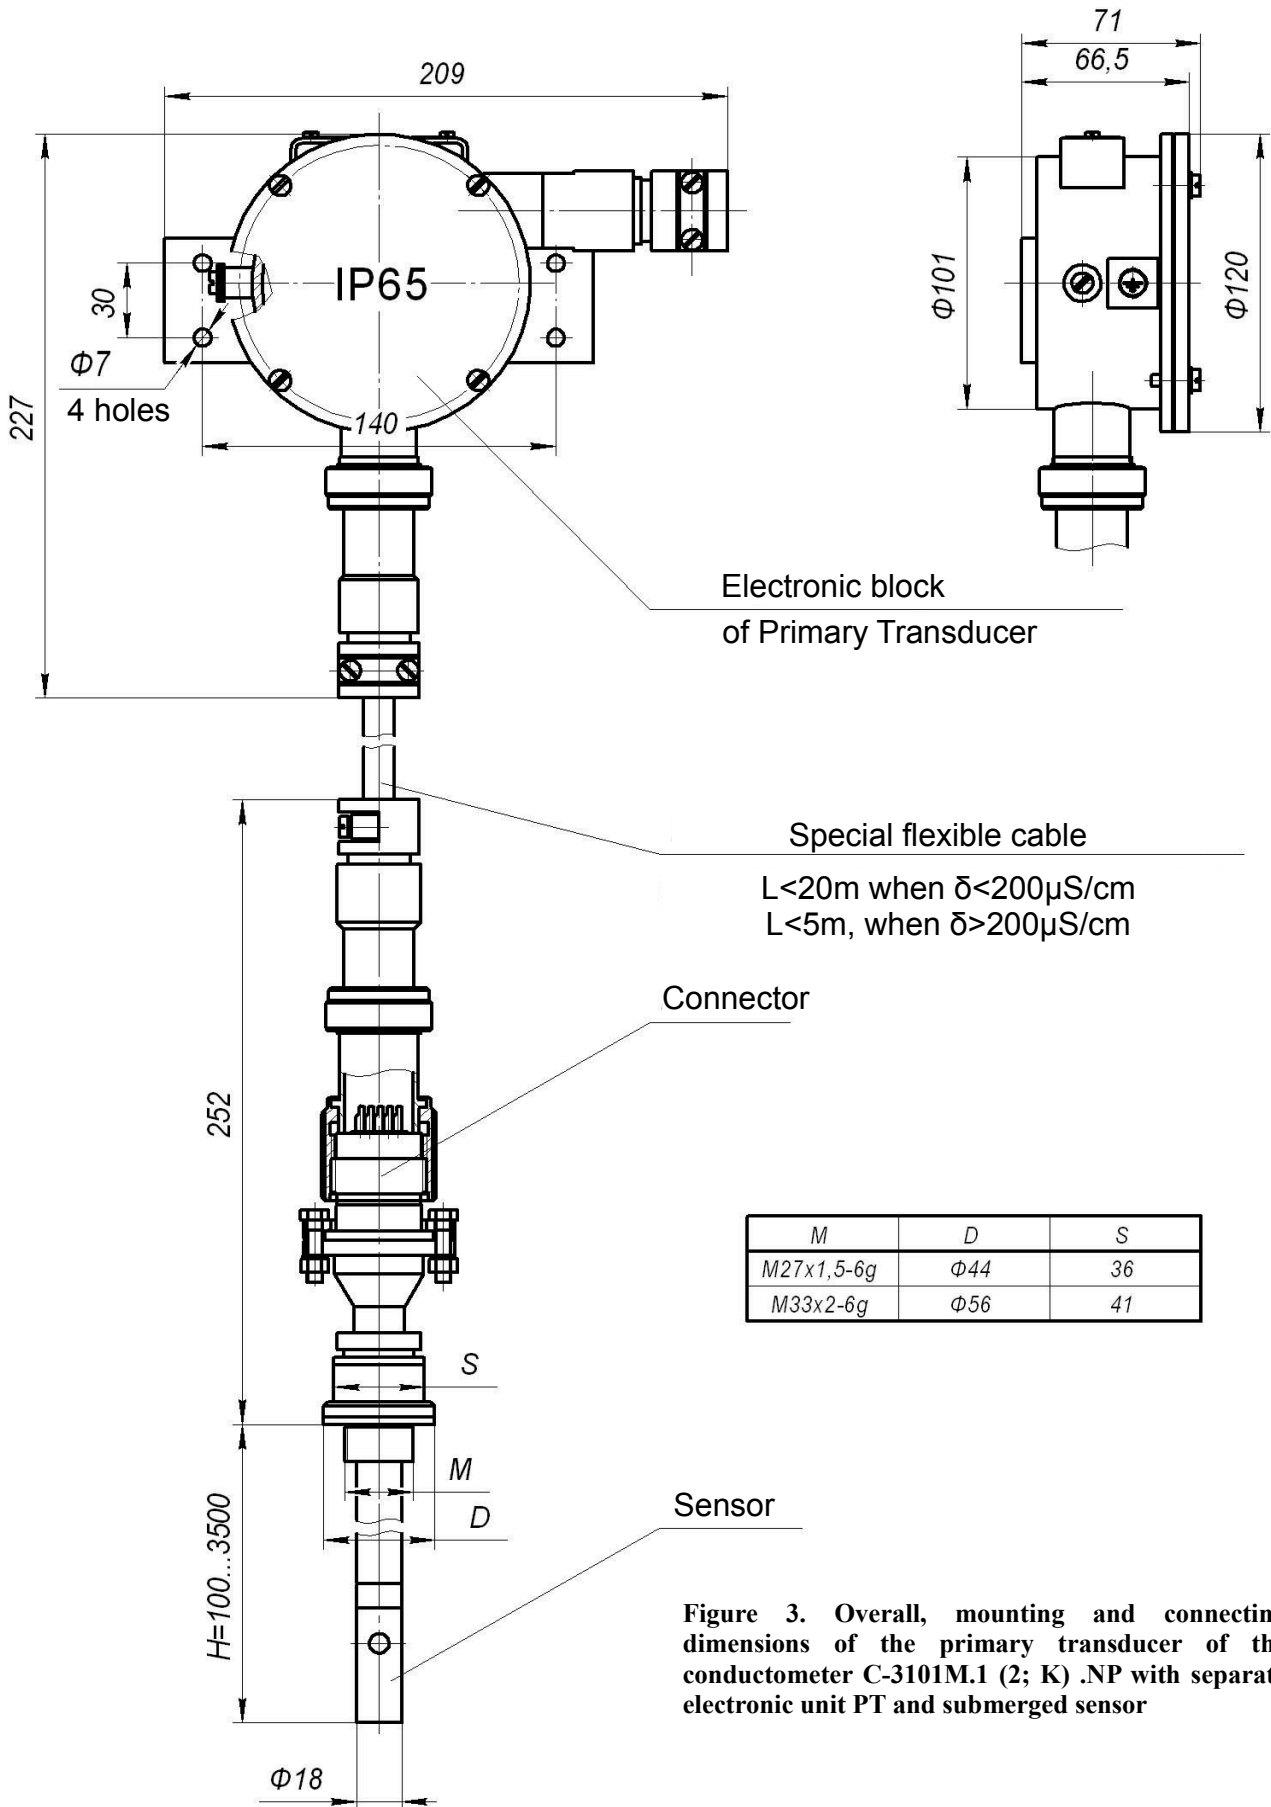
Overall, mounting and connecting dimensions of the primary transducer of the conductometer C-3101M.1 (2; K) .NP with separate electronic unit PT and submerged sensor
